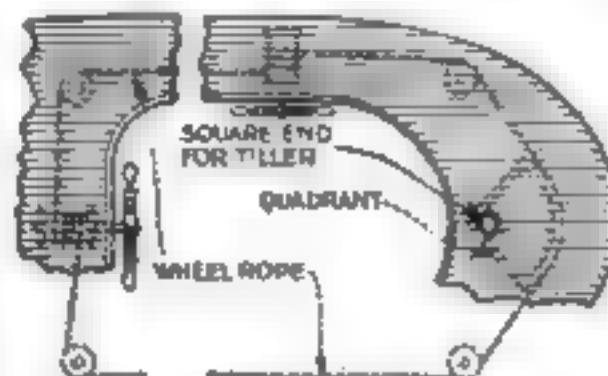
Diagram of front and side wheel arrangements for steering, the former being the more convenient.
